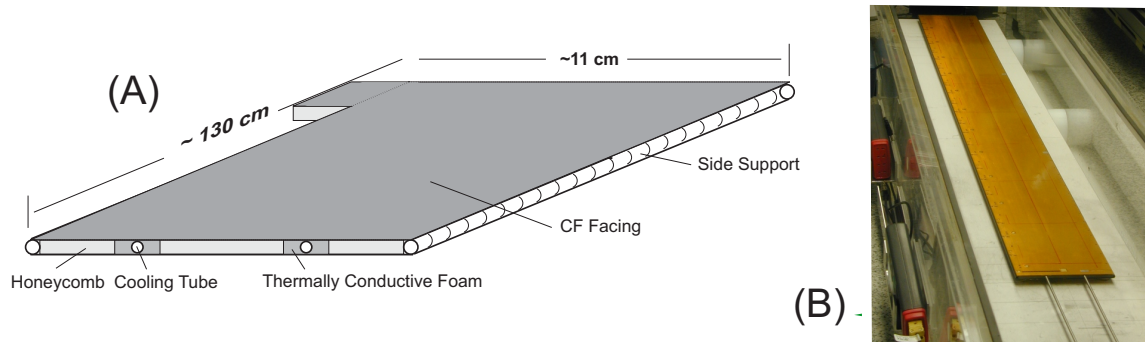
a) Drawing of a stave core. b) Photo of a stave core with a kapton bus co-cured into facing.
